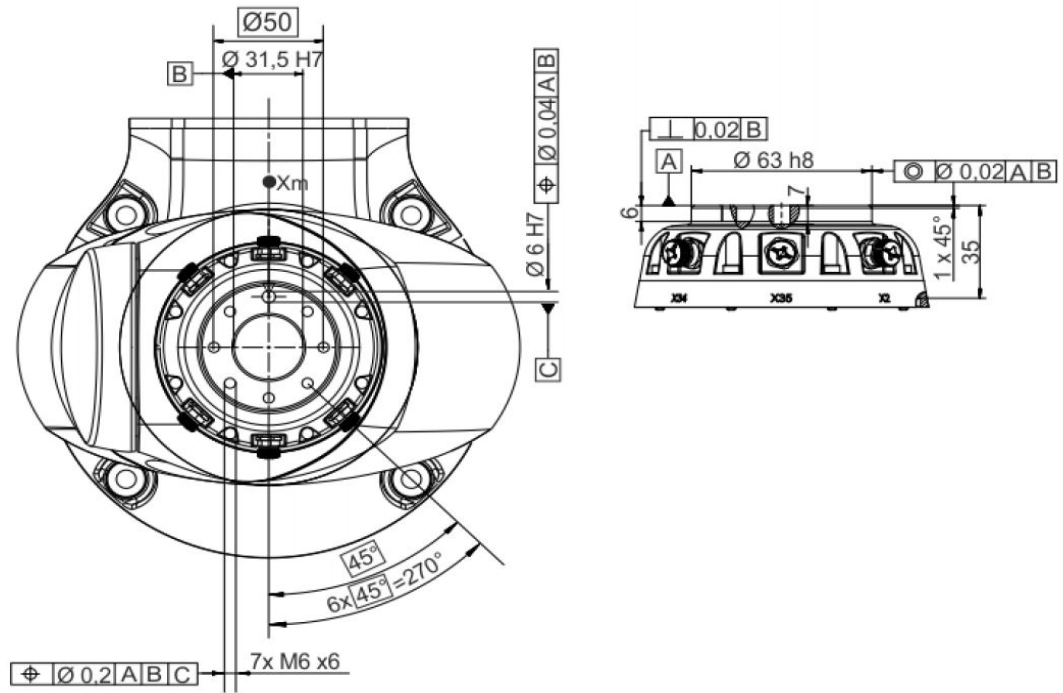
Dimensions of the KUKA manipulator's media flange [142].
